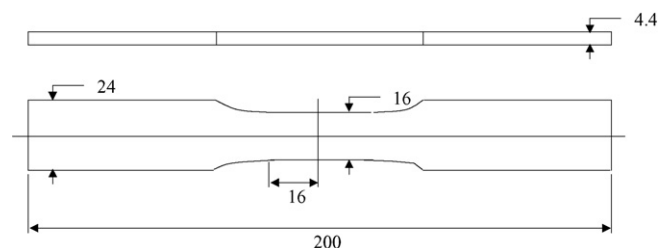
C410 specimen geometry used in this study. Dimensions are in millimeters.
